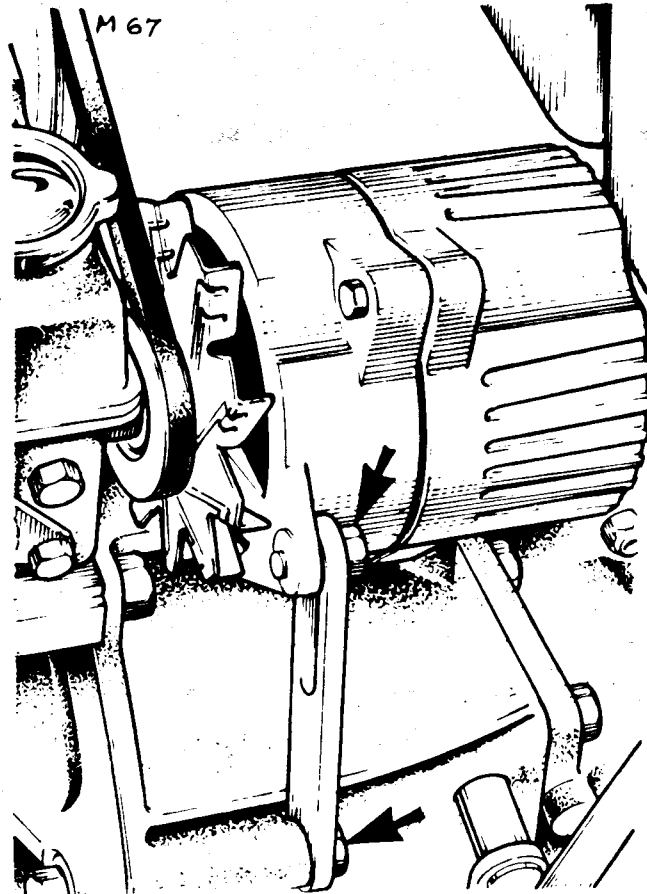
ALTERNATOR ADJUSTING SCREWS.
